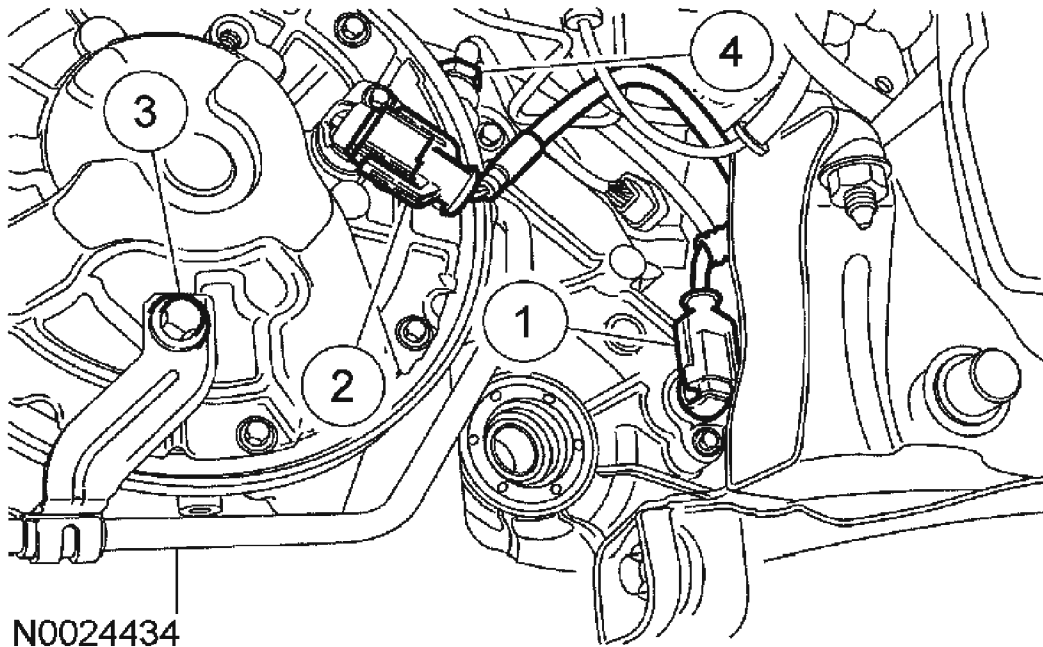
Locating Transmission Fluid Cooler Tube
